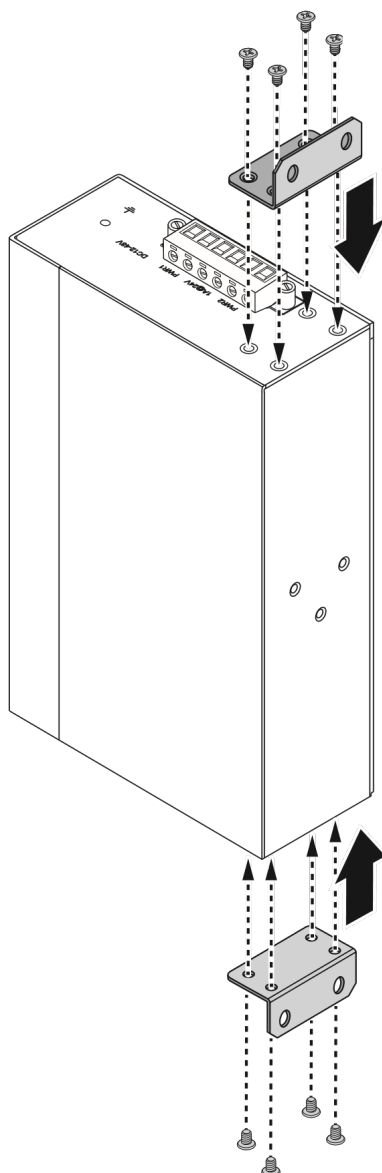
Installing Wall Mount Plates (EKI-122x Series)
